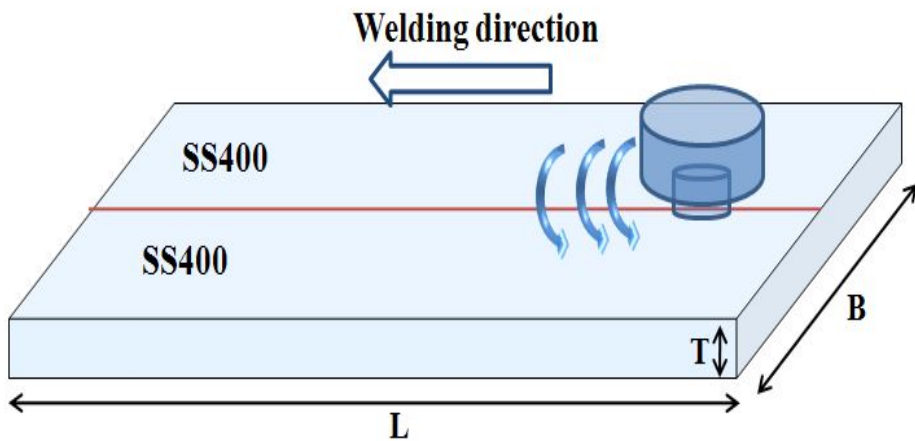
Schematic illustrating of friction stir welding
